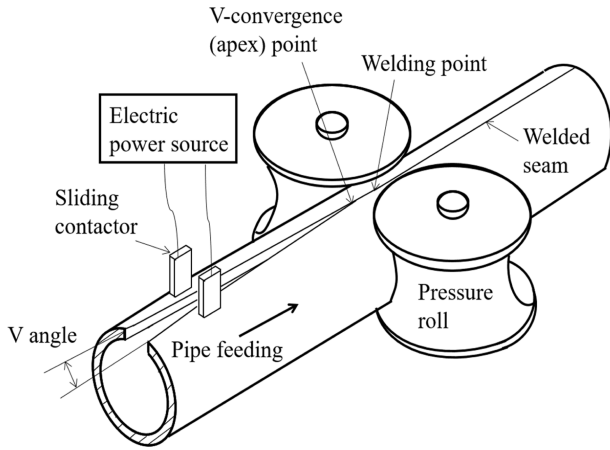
Schematic drawing of high frequency resistance welding process of steel pipe [4] (Adapted from Ref. 4 on the basis of OA)
